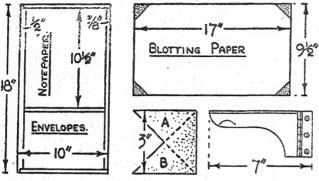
Details of drawer Fig. 3—The pad, corners and hinge covered with doll's house ing which is mitred at the corners. The division to attaching the leatherette pockets, piece should fit between the back and front.
